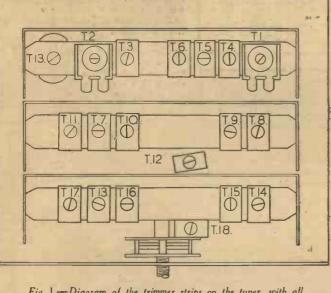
Diagram of the trimmer strips on the tuner, with all trimmers identified.
